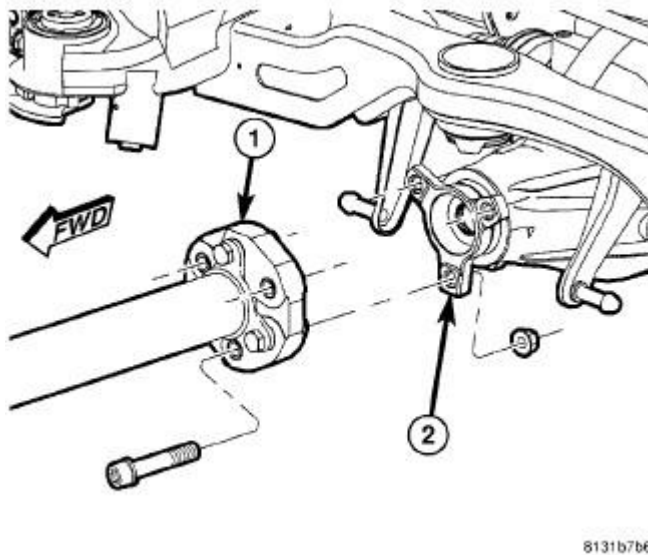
Propeller Shaft Coupler & Rear Axle Flange
